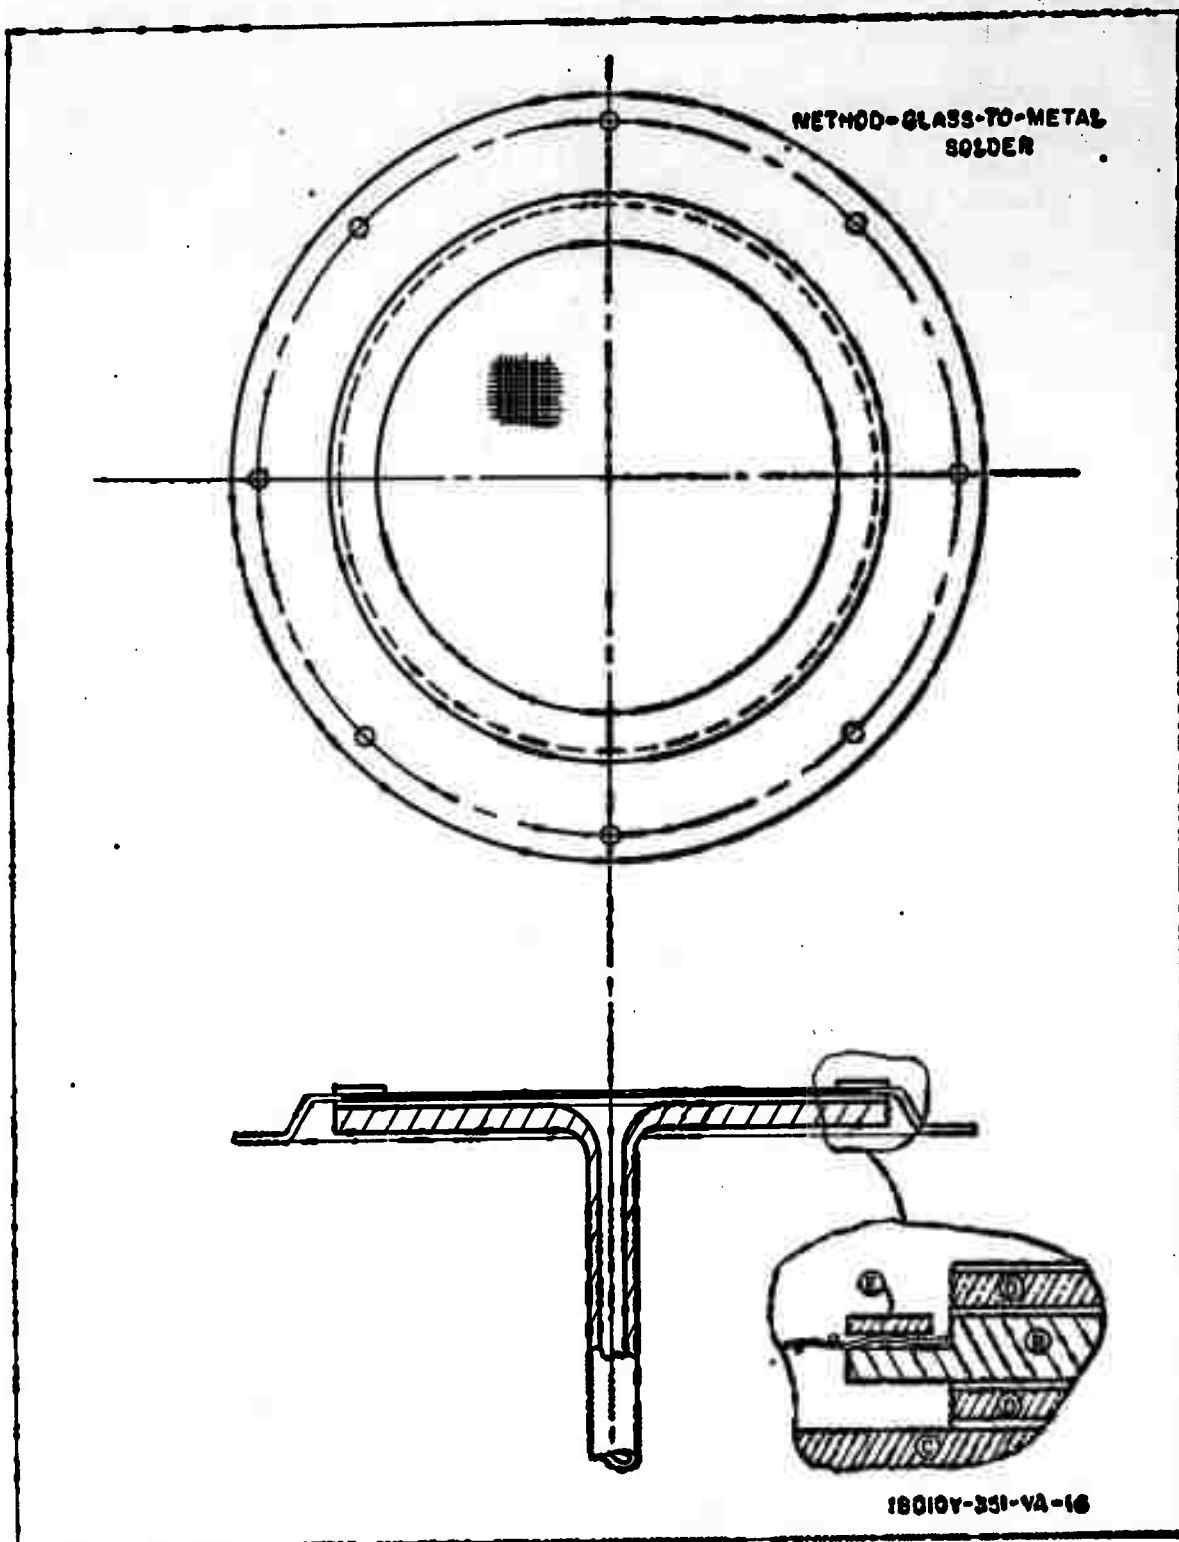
WX-4209 Photoemissive Power Converter Assembly
